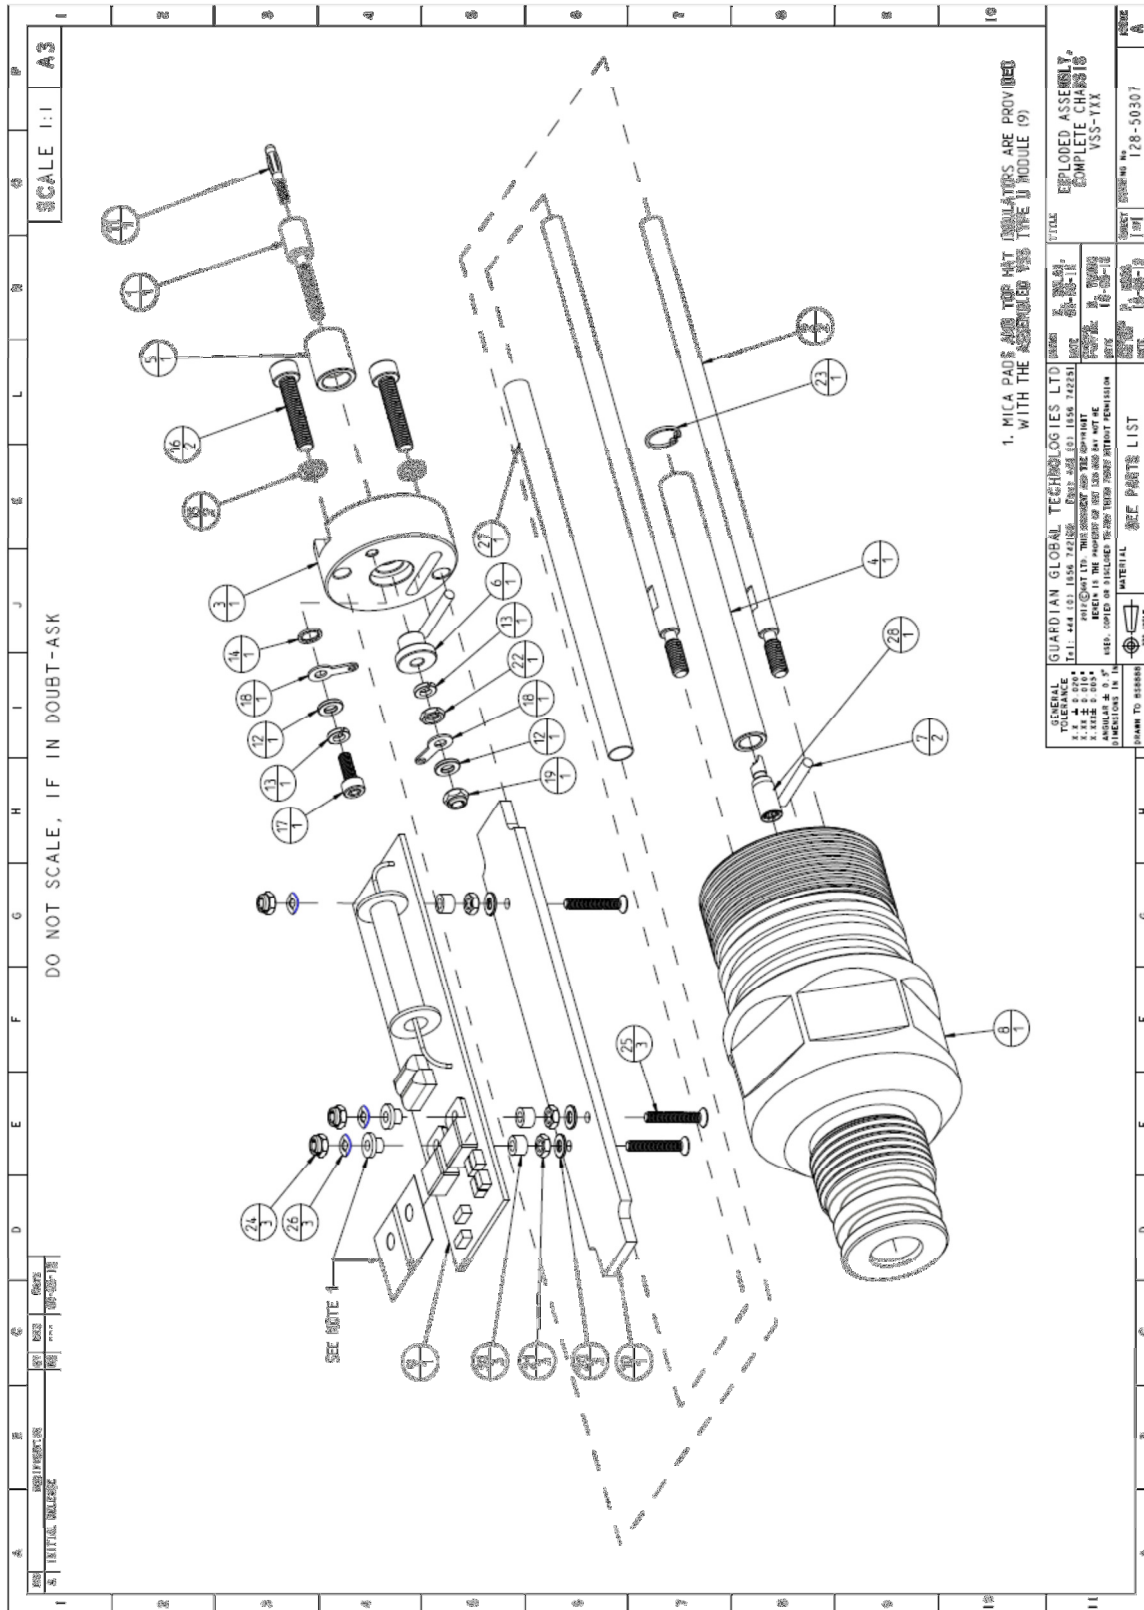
Exploded Assembly Completed Chassis Drawing, VSS-Y – 128-50307-A
